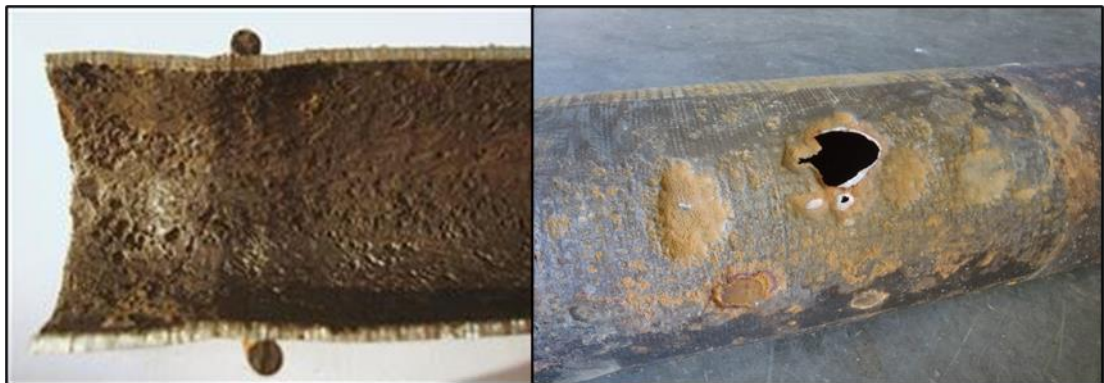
Example of extreme pipe pitting corrosion.
